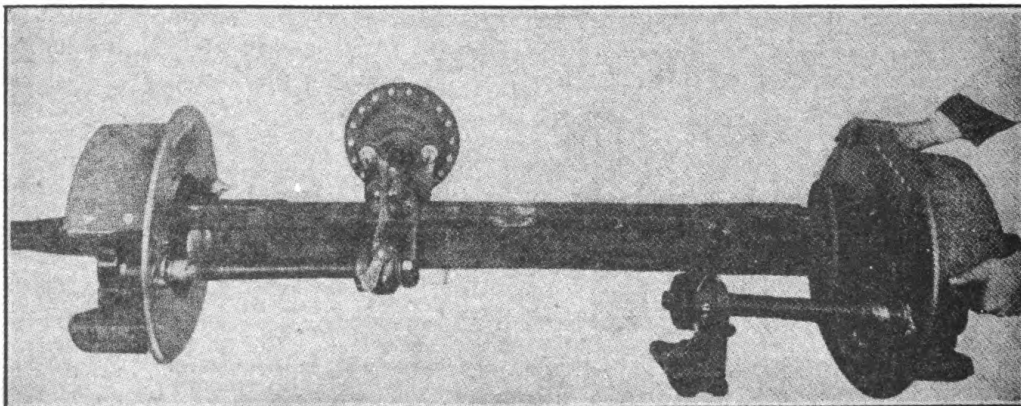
REMOVING BRAKE ASSEMBLY IN ONE UNIT
